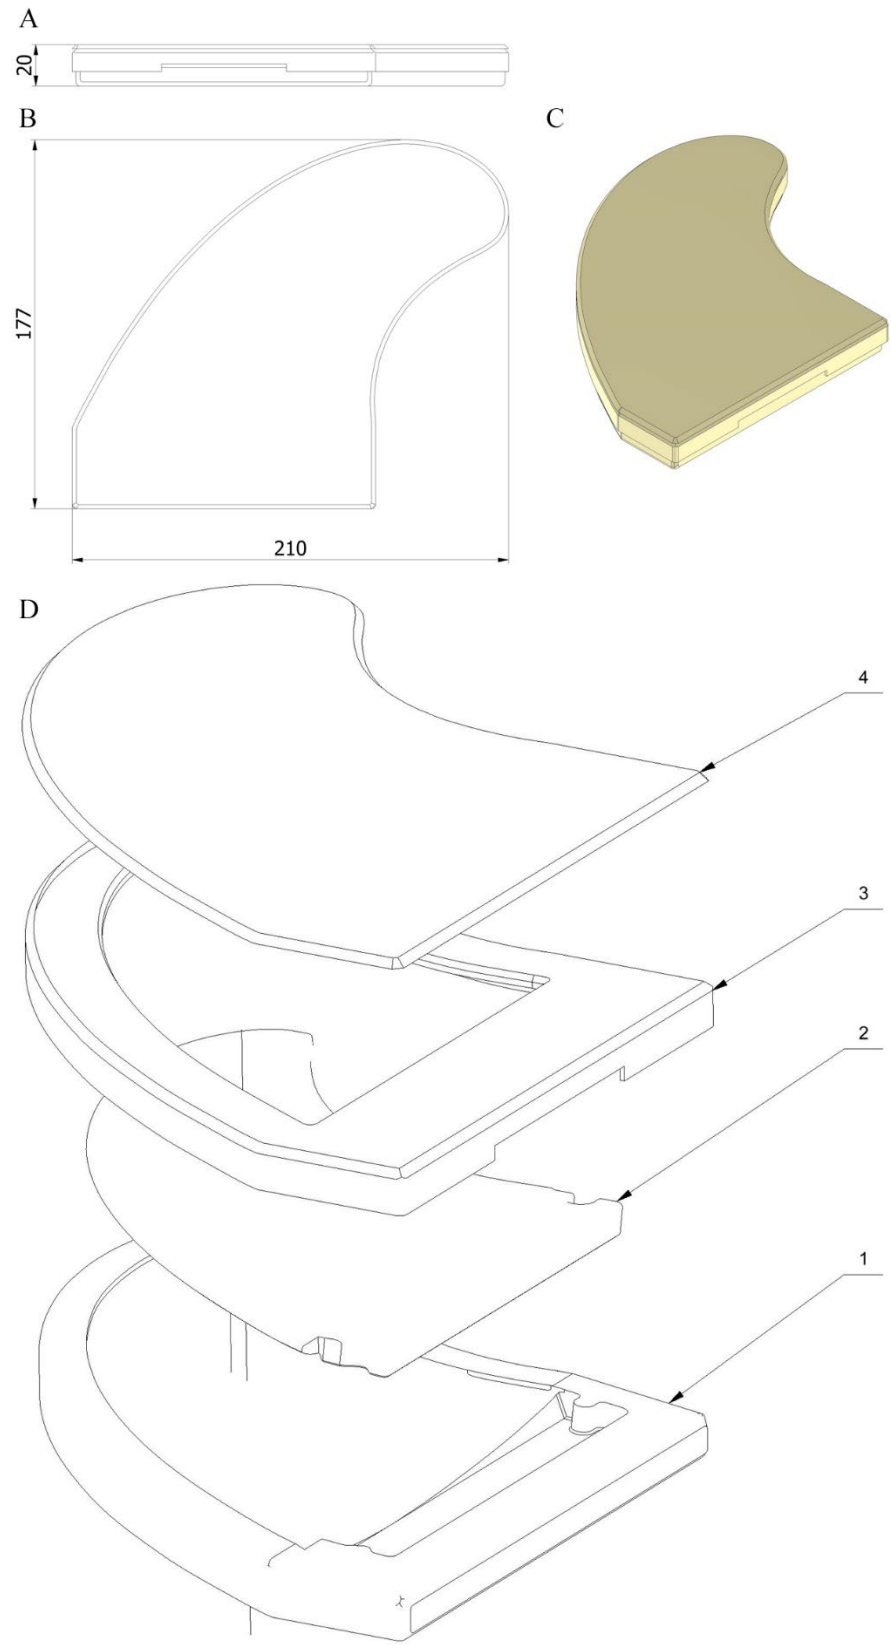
CAD model of a mould for surfboard fin. A) side view. B) top view. C) isometric view. D) Exploded view of a mould for surfboard fin. Numbers depicted in D are explained in Table 2.8. Numbers 20, 177, 210 in A-B indicate height (mm), length (mm), and width (mm), respectively.
